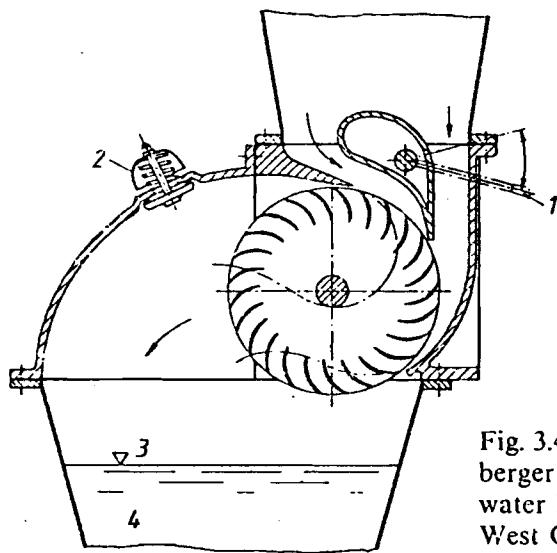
Cross section of a Michell-Banki turbine of Ossberger design; 1 control vane; 2 snifting valve; 3 draft tube water level; 4 draft tube (Courtesy Ossberger Weissenburg, West Germany).
